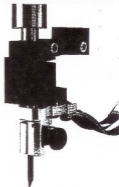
Close-up of the Model HE50 Unitip Electrode Holder with Model UTM 112C Unitip Electrode.
